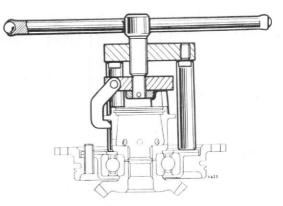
Extractor T.77690 for removing the oil separating breather chamber.
